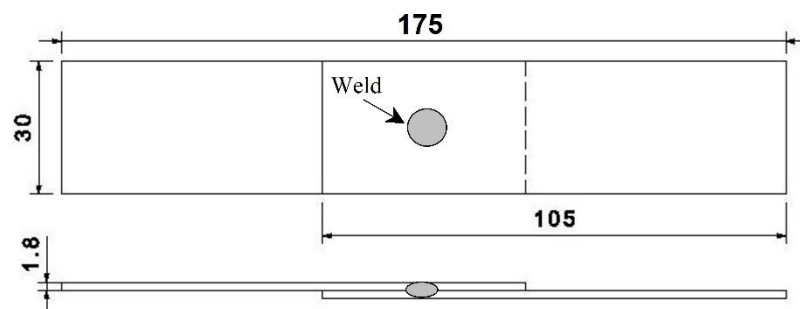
Dimensions of the static tensile shear test sample (dimensions in mm).
